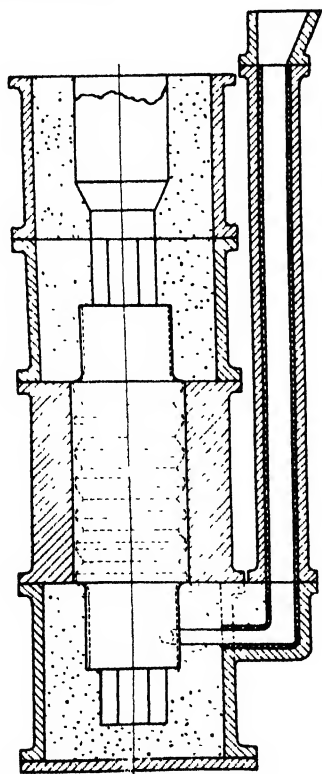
12. Vertical section of mold for casting a plain-bodied roll, or a shape roll in which grooves are machined from the solid (dotted lines).
